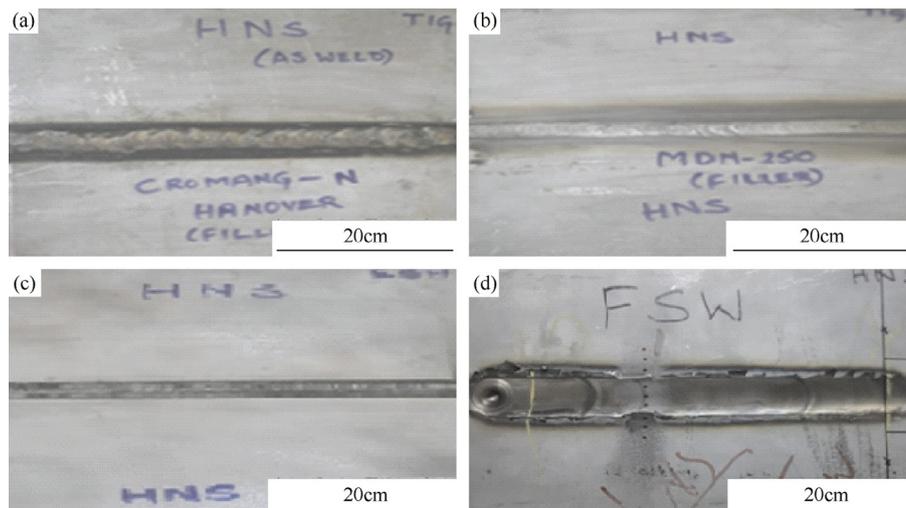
Macroscopic appearance of the high nitrogen stainless steel welds (a) SMAW; (b) GTAW; (c) EBW and (d) FSW.
